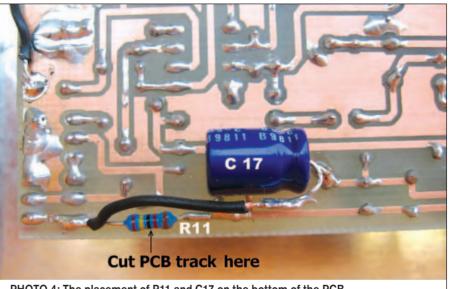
The placement of R11 and C17 on the bottom of the PCB.
